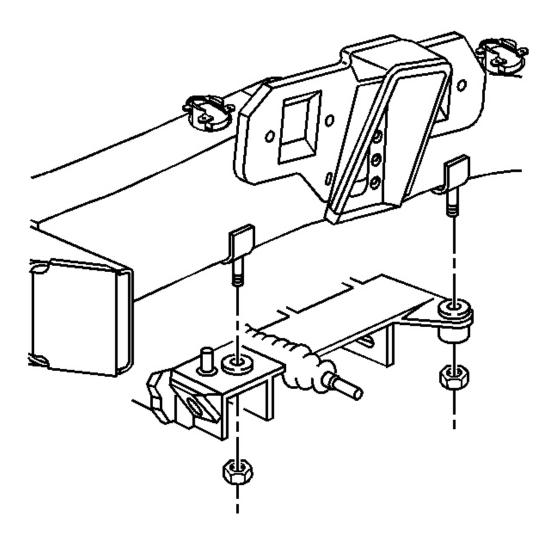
View of Crossmember Nut & Bolt - Front Courtesy of GENERAL MOTORS CORP.
